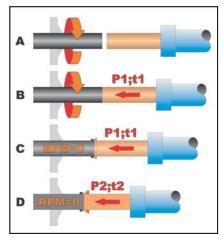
EQUIPMENT OF ROTARY FRICTION WELDING [2]
